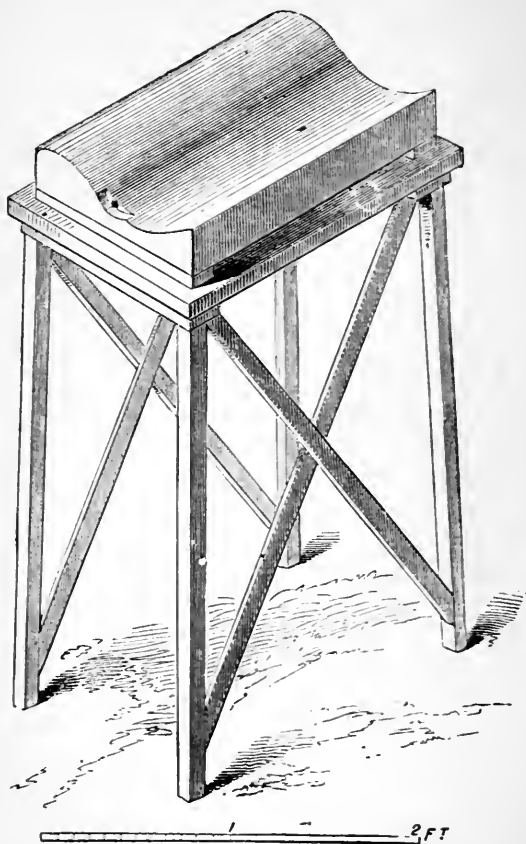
It is furnished with a *trug* or trough, in which the moulder dips his hands when moulding, and with a *block and stock-board*, on which the tile mould is placed in the operation of moulding.
